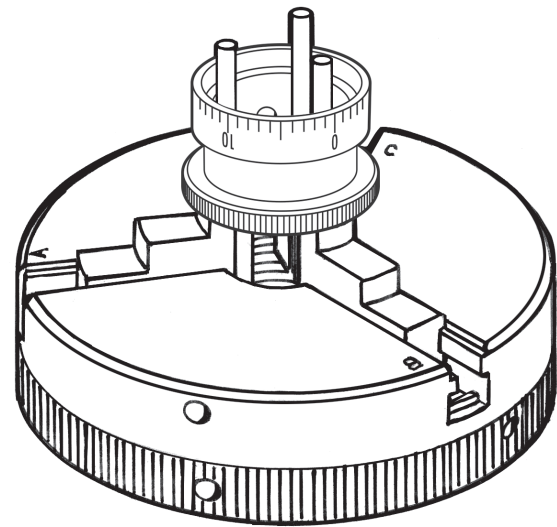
Round parts can be held by the pins from the inside so marks can be laser engraved all the way around the outside surface when the chuck is held on a Sherline CNC rotary table.
